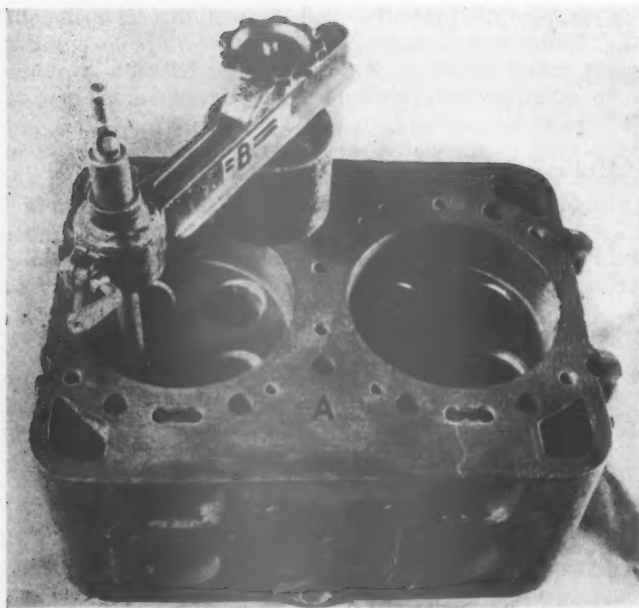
Valve-seating and guide-reaming tool: The mandrel is operated by hand to face the valve seats, while an air motor is used to face new seats
